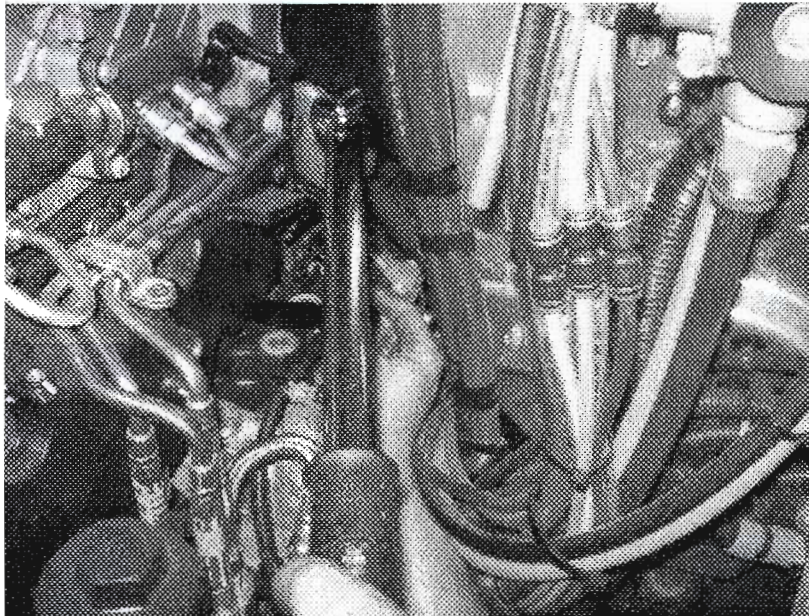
Torquing Of Two Inner High Pressure Pumping Element Bolts
